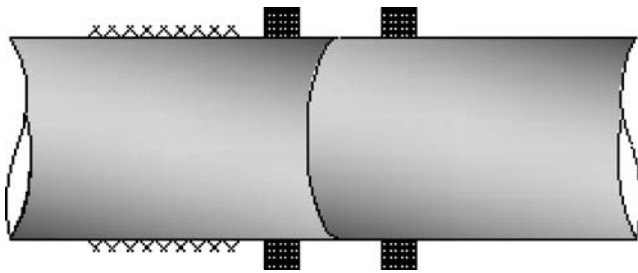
Magnetically impelled arc butt welding—phase 2
